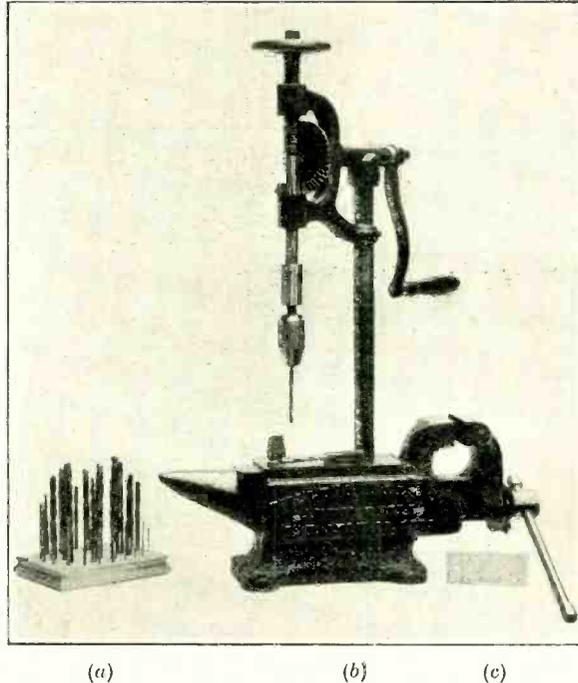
(a) Set of twist drills in stand. (b) Combination tool incorporating a drilling machine. (c) A drill gauge-plate.
